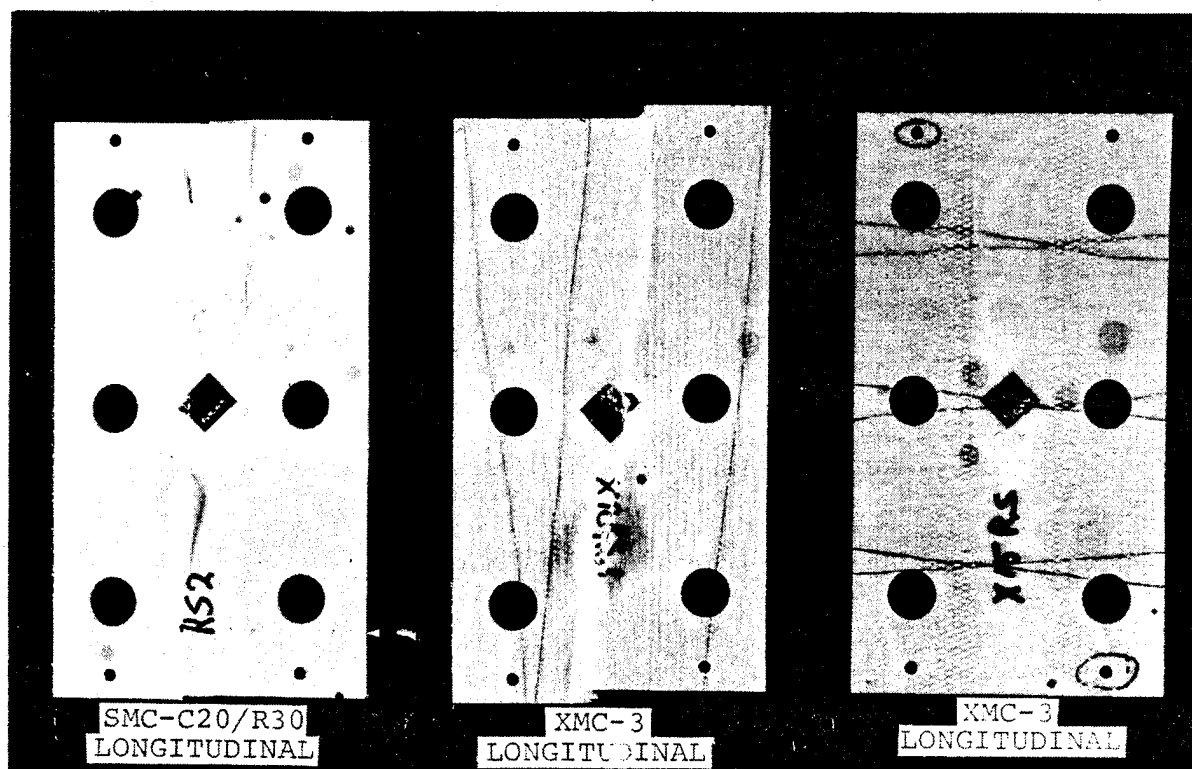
FRACTURED RAIL SHEAR SPECIMENS - SMC-C20/R30. XMC-3
